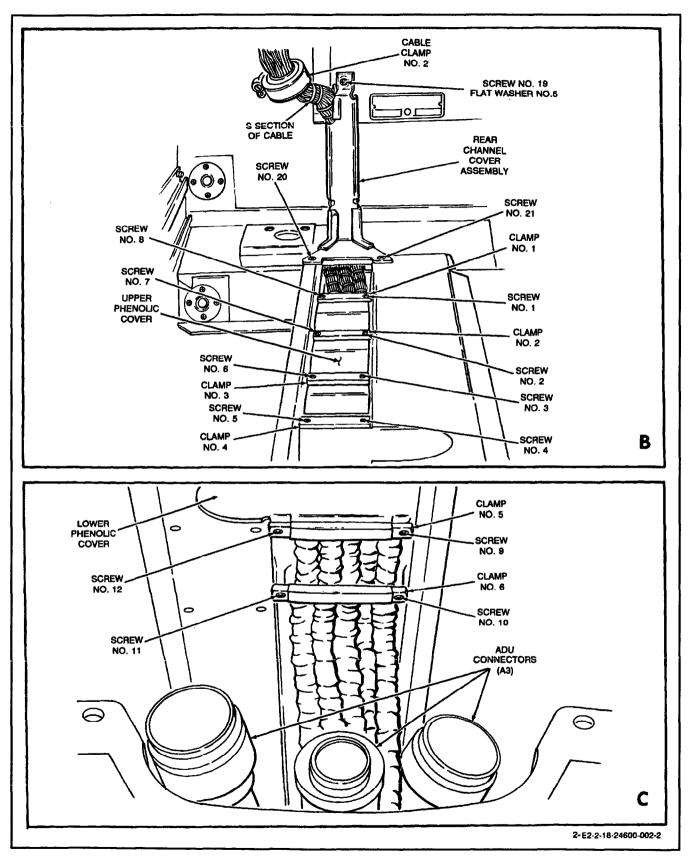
Removal and Installation of Cable Assembly Set OD-214/APQ-179 (Sheet 2)
